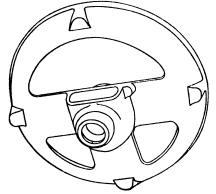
PERSPECTIVE VIEW OF END-SHIELD CASTING IN THE ROUGH
